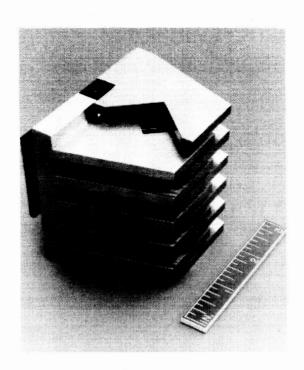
Hand Preliminary Mechanical Assembly and Claws Intermeshing
